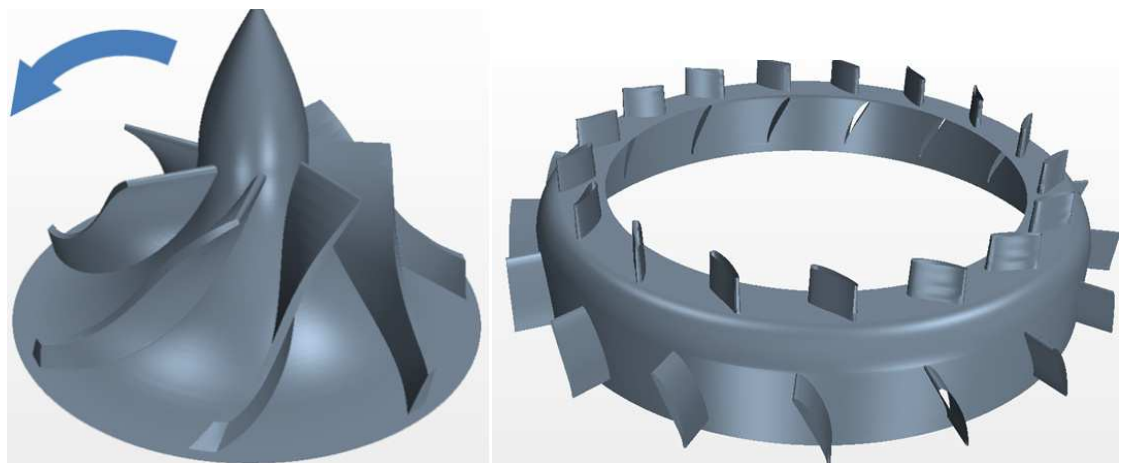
3: Dyson V2 impeller configuration (including impeller and diffuser).
